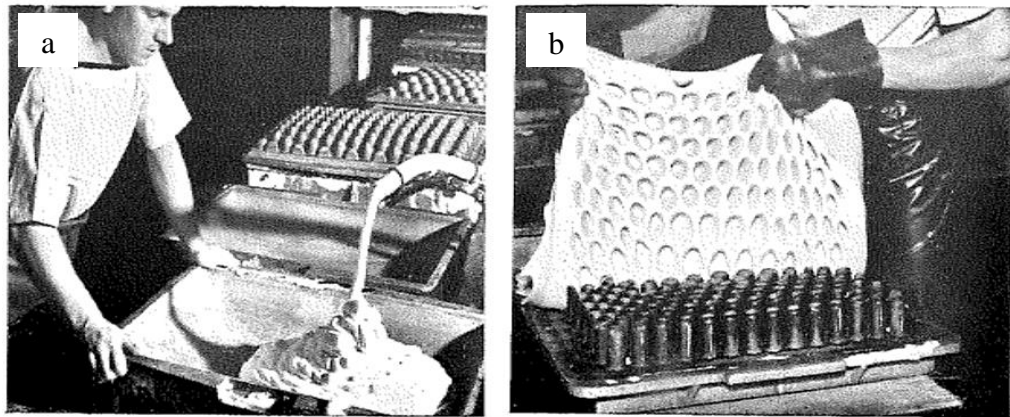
(a) Filling moulds; (b) Stripping a latex foam from the mould after vulcanisation [51].
